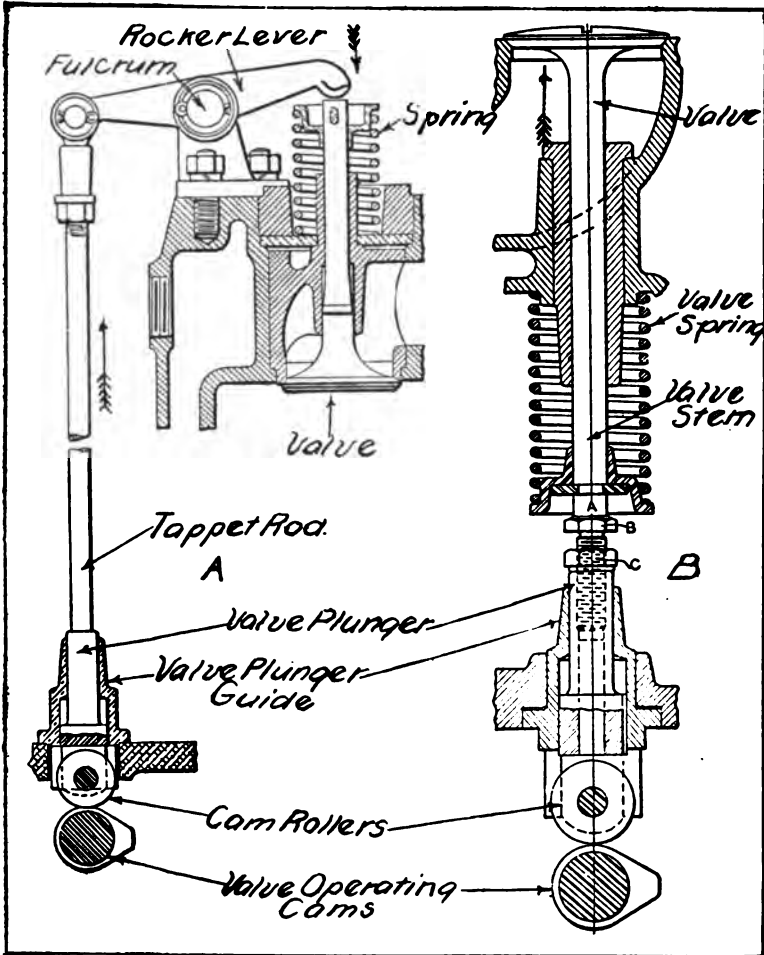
Conventional methods of operating internal combustion motor valves.
